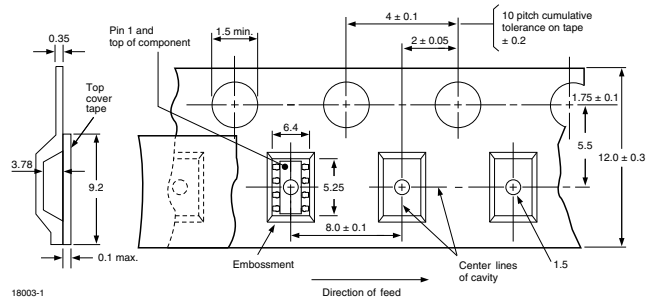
Tape Dimensions, 2000 Parts per Reel
